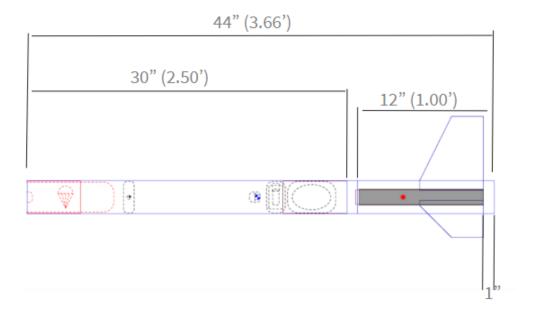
Dimensions of rocket body, differentiating motor section from the rest of the body
